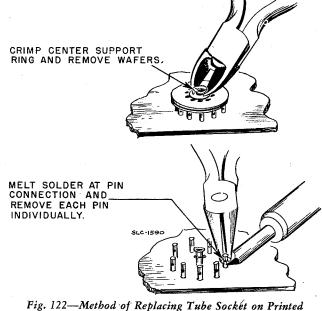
Method of Replacing Tube Sockét on Printed Circuit Boards.
